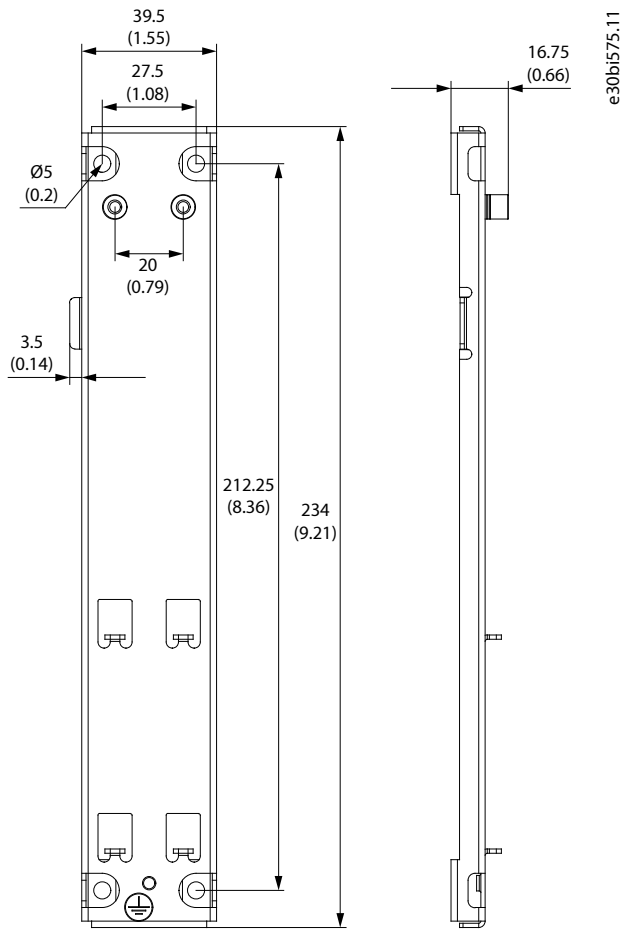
Dimensions of the Modular Control Unit Mounting Plate in mm (in), 2 Places
